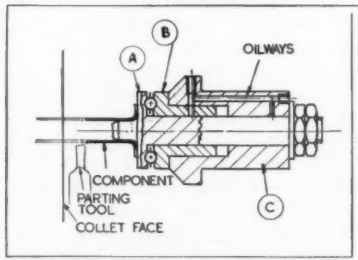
The forming of one side of the head is accomplished by the tool shown here, the rotating parts being a special style of thrust bearing
